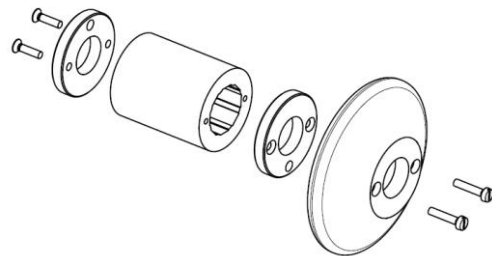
Remove the crosshead & slotted screws on the actuator part 2, replace the slide bearings on both side with the new ones.
